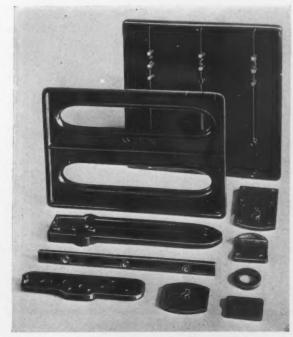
More extensive application of molded nonmetallic materials includes various machine parts
